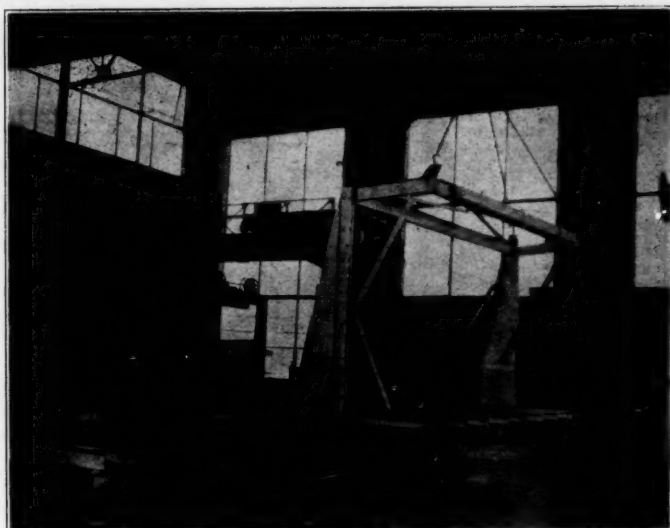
SUSPENDED CHARGING RACK, USED IN LOADING AND UNLOADING CAR-BOTTOM FURNACE. LOADING TABLE SHOWN AT REAR LEFT, WITH CHARGE READY TO TRANSFER TO FURNACE
